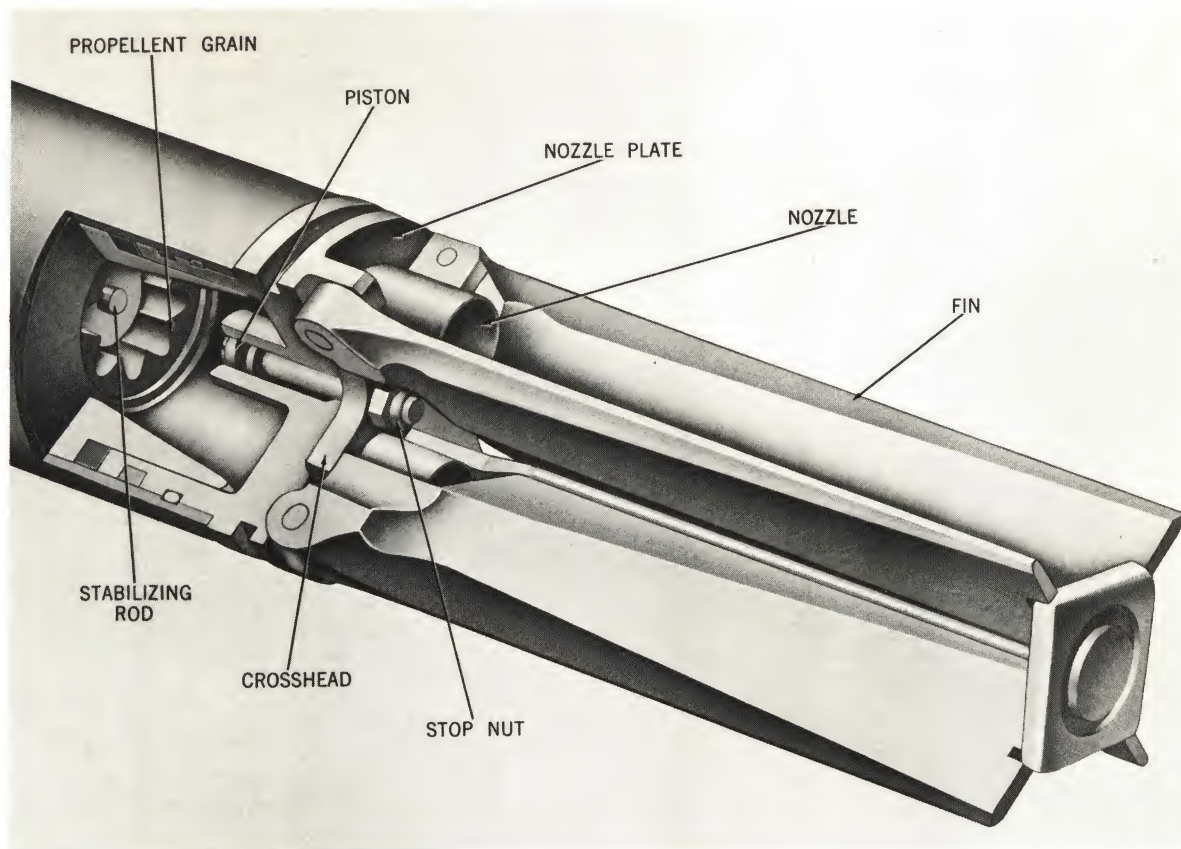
Nozzle-Fin Assembly, Cutaway View.
